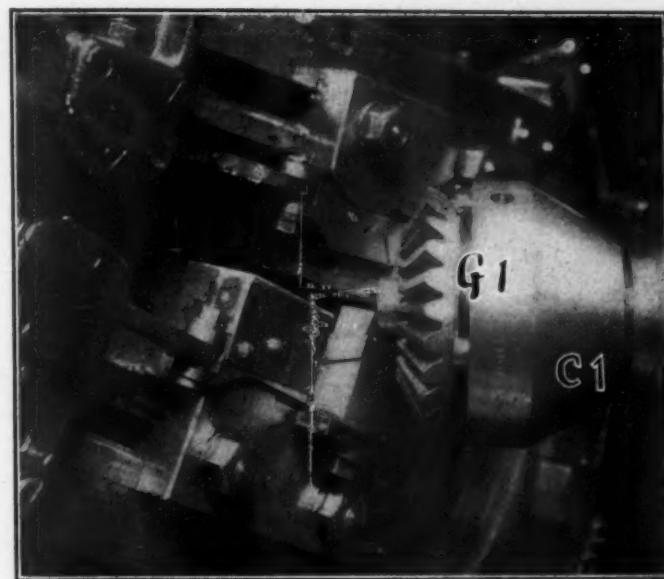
Gleason planer profiling bevel gears after they have been gashed in the milling machine
